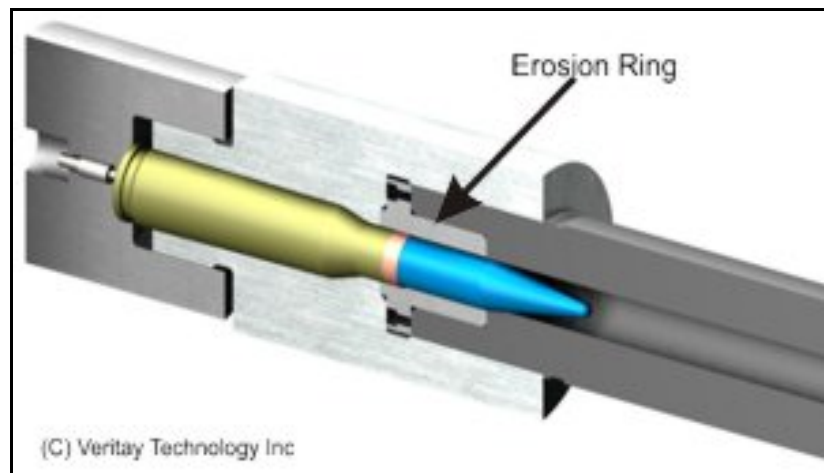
A view of Gun-bore and the erosion ring [5]
